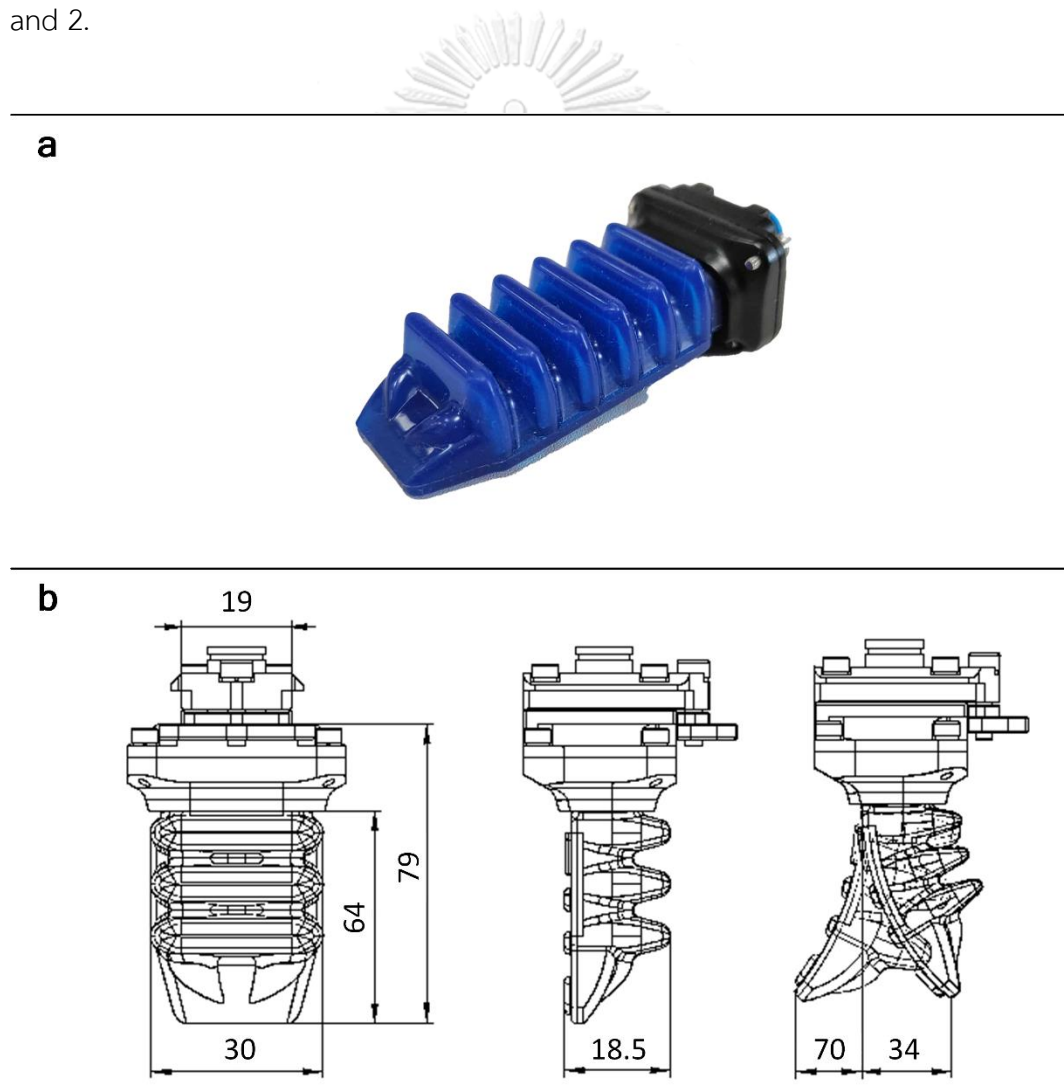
SRT M3064 SPA: (a) photograph and (b) dimensional drawing⁸⁹.
